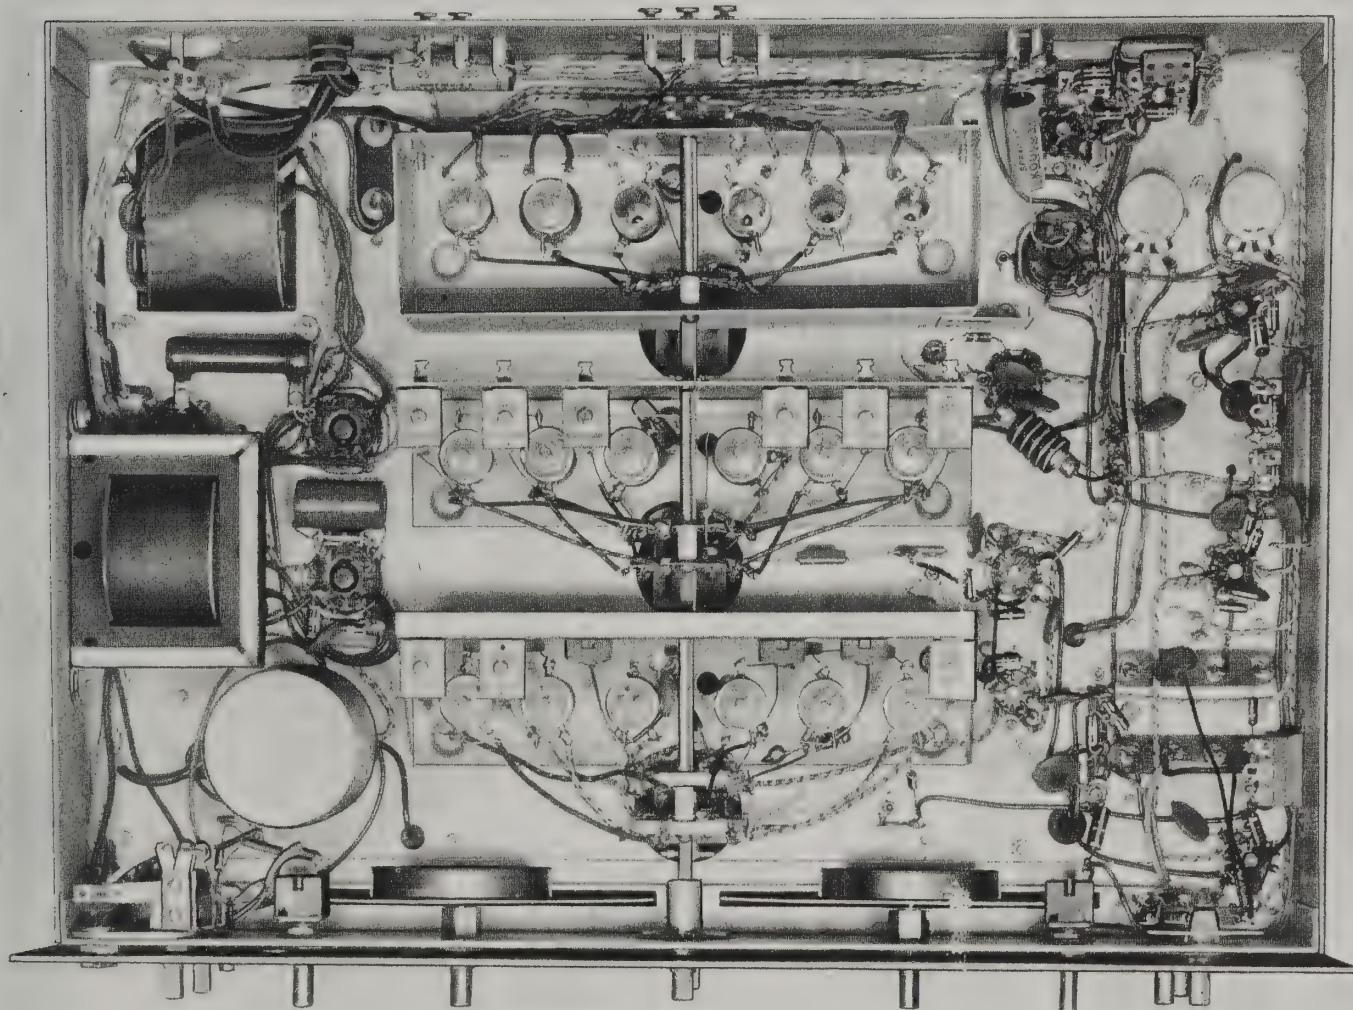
Bottom View of Chassis, Showing Trimmers and Coils
